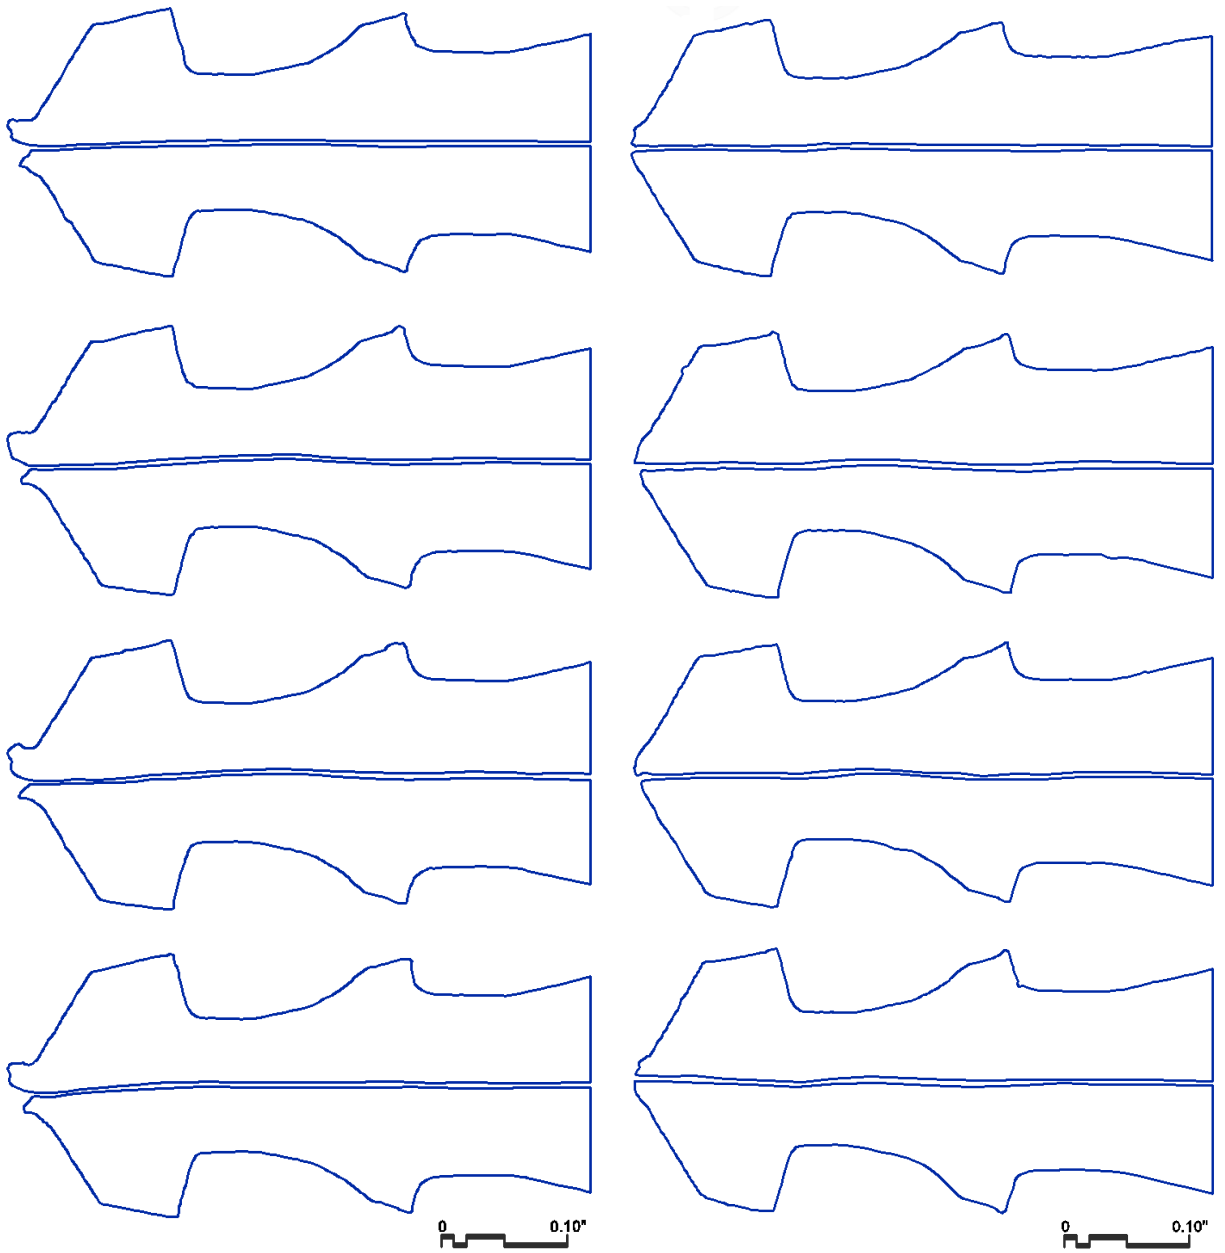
As-Built 0.090 in. Tube-C Coined Pressed-End CAD Generation - Step 4
